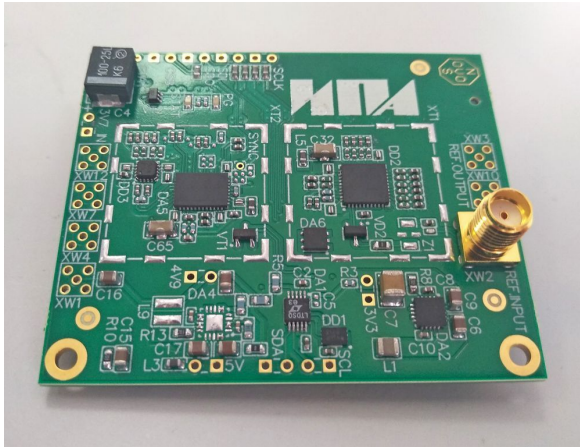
DSP unit without radiator, front-end board, and front panel.
